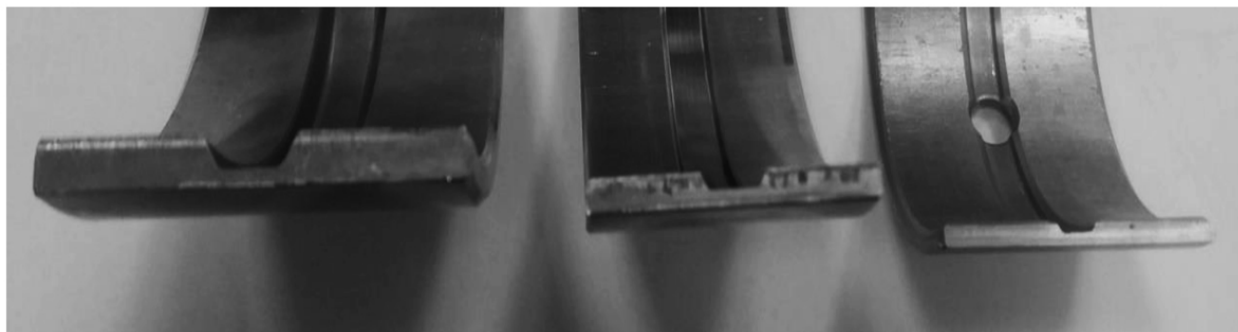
Oil grooves with different types of groove geometry in modern automotive slide bearings (from author archives)
